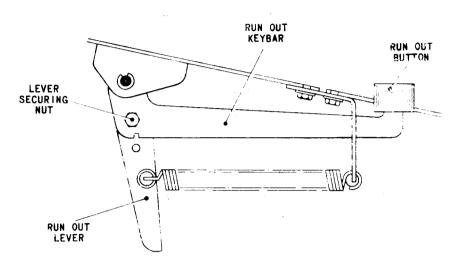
RUN OUT KEYBAR ASSEMBLY
